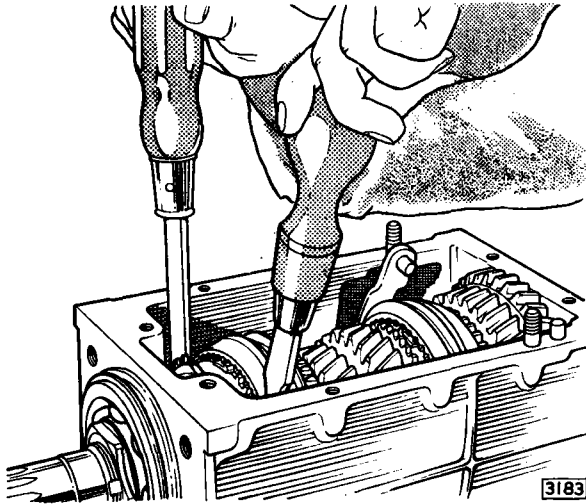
With the aid of two levers, ease the constant pinion shaft forward.
